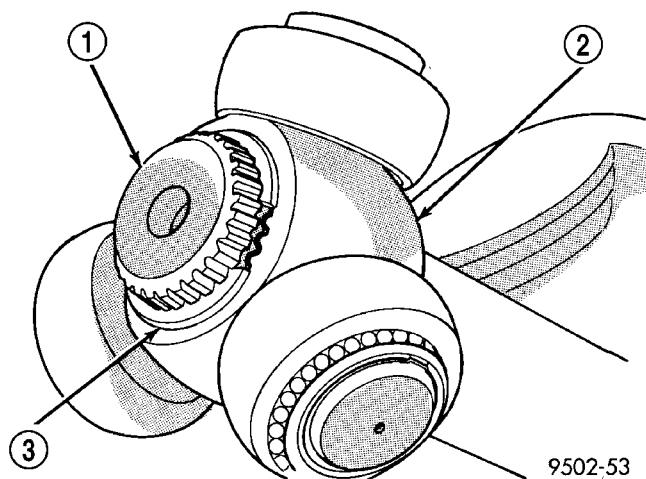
Spider Assembly Retaining Snap-Ring Installed
